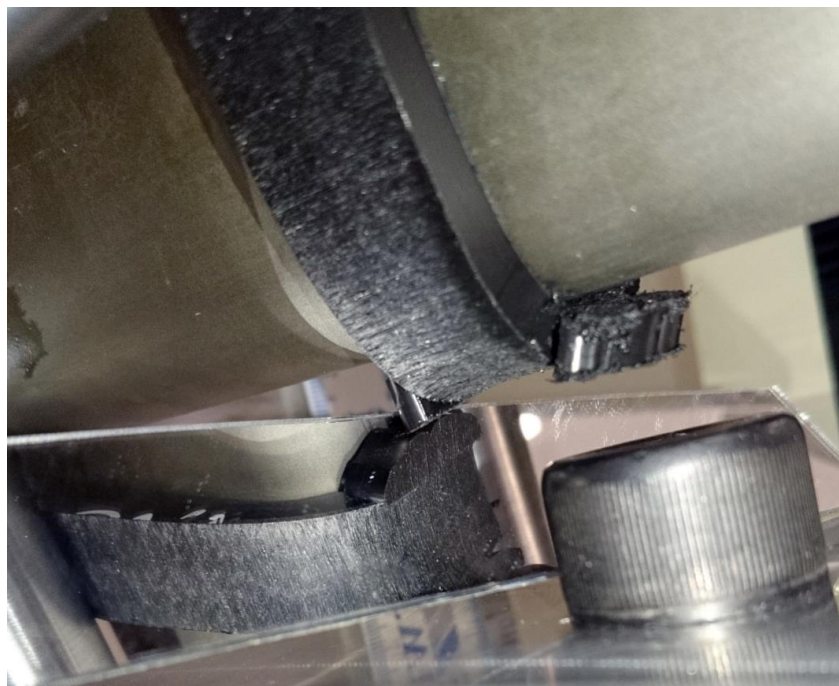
Photograph of guided side bend test specimen at maximum bend angle showing no visible cracks in the specimen
